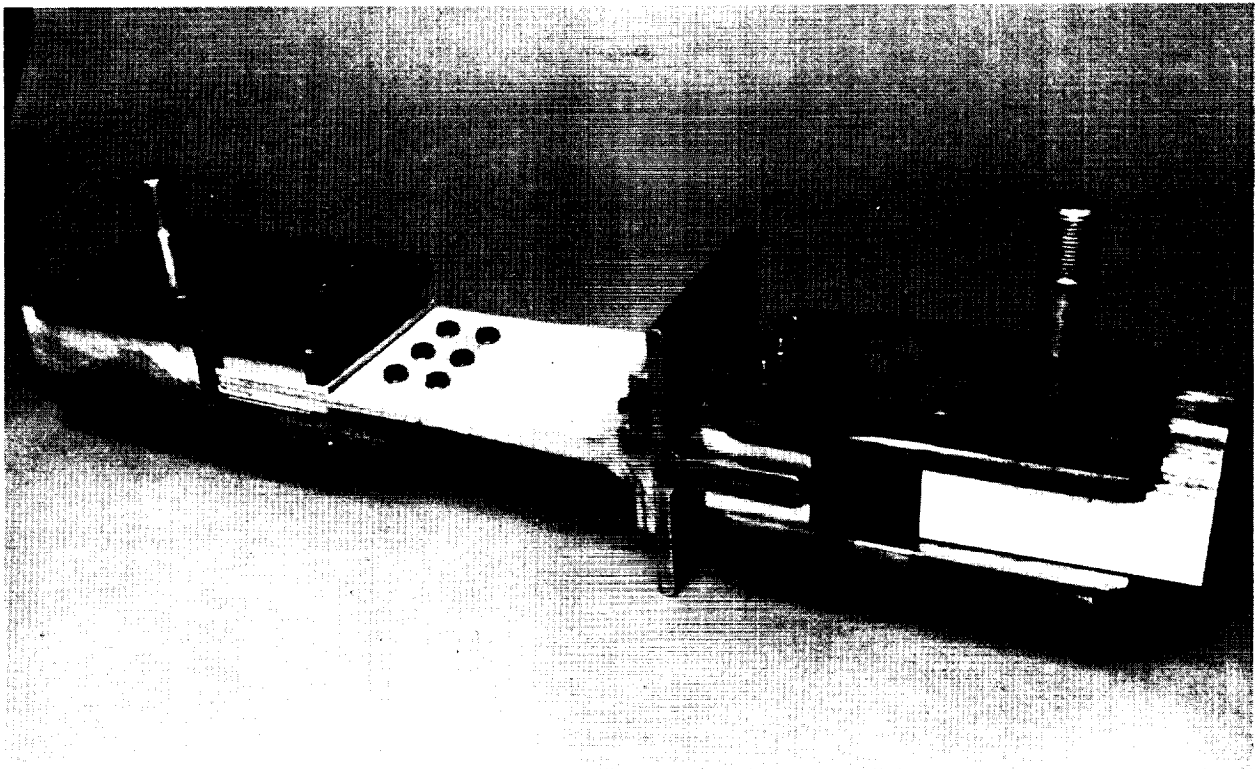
SIDE VIEW OF FLANGED COMPOSITE LAY-UP READY FOR TENSION TEST
